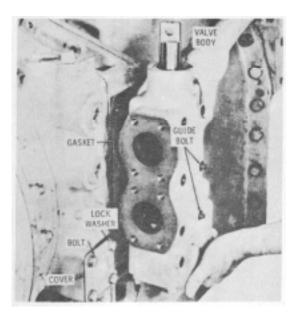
Installing Hydraulic Retarder Control Valve Body Assembly
